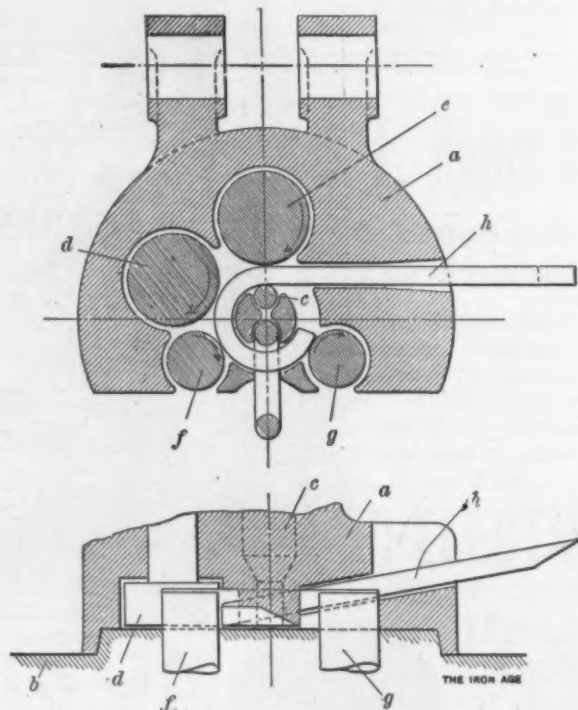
Plan and Elevation of the Forming Mechanism, Known as the Cap.
